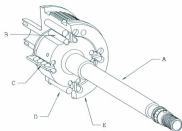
Drive gear torque transmission joint drive component arrangement.
